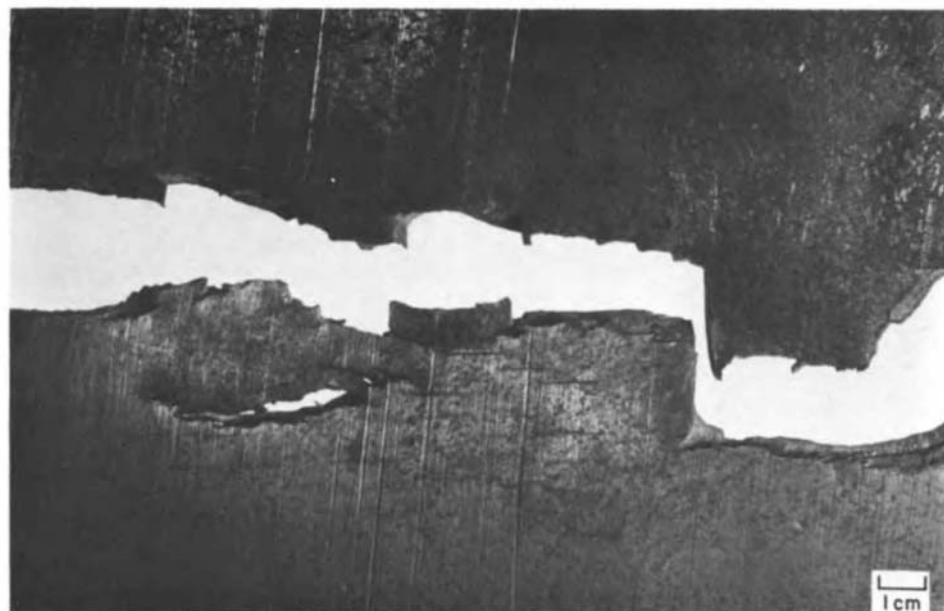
Secondary cracking in pipe surface adjacent to stress-corrosion cracks shown in Fig. 2. Actual size. See also Fig. 4 and 5.
